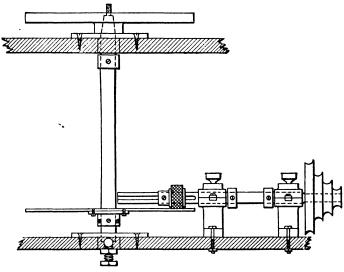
Horizontal running lap wheel showing details of construction. Note tapered shaft to permit easy removal of master lap. (Courtesy of Clinefelter Lapidary Supplies, Oswego, Ore.)
